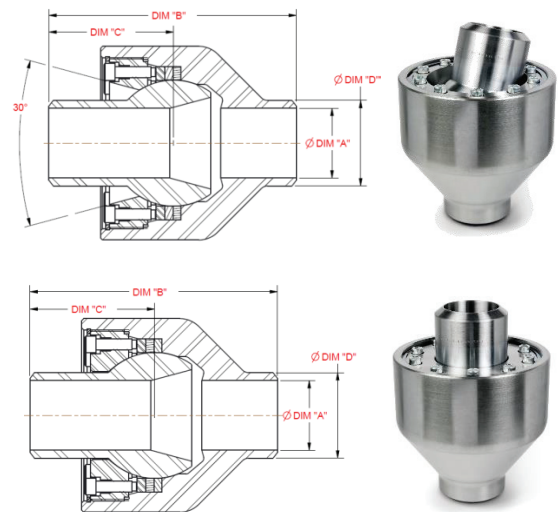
BALL JOINT DIMENSIONS (TOP: FLEX, BOTTOM: ROTA)
